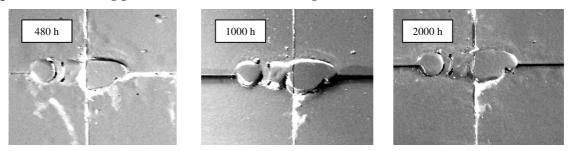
Spot welding panels of Sample 2 – observation by 480h, 1000h, 2000h
